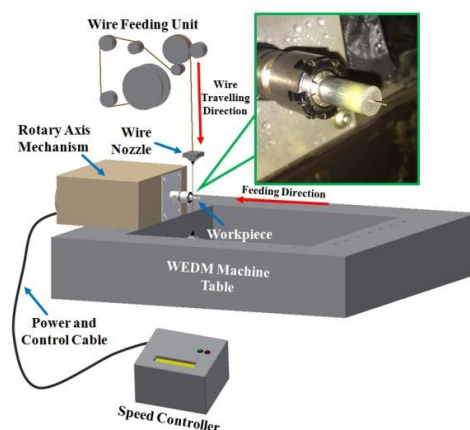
Location of rotary axis mechanism mounted on WEDM machine table.
